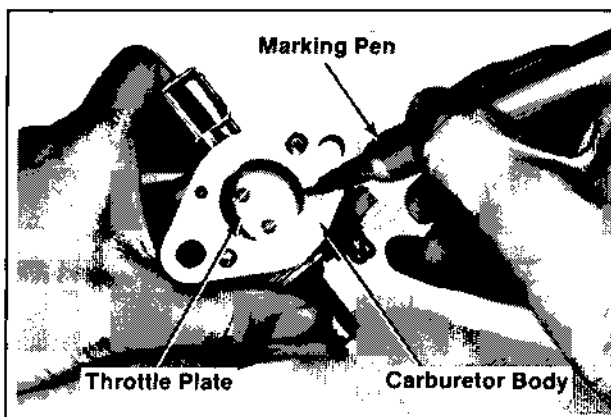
B-7. Marking Throttle Plate and Carburetor Body.
